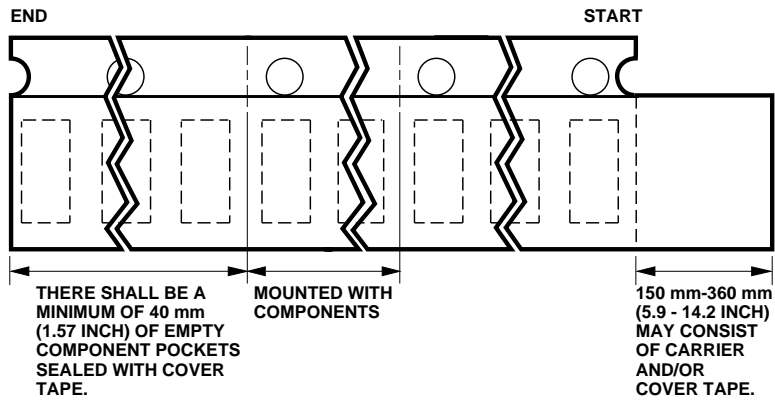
Tape Leader and Trailer Dimensions for HSMx-H690/H790 Series.
